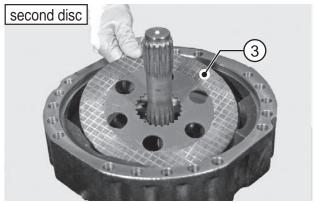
The second brake disc (3) to be inserted must be of friction material.
